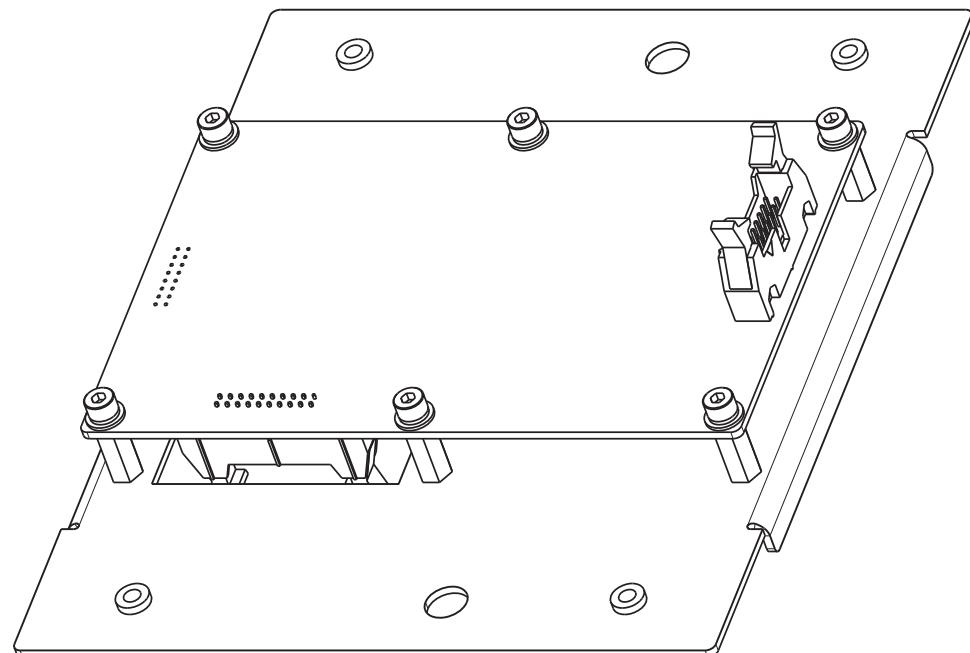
Detail of ADIB Subassembly for 680 Amp VFD
